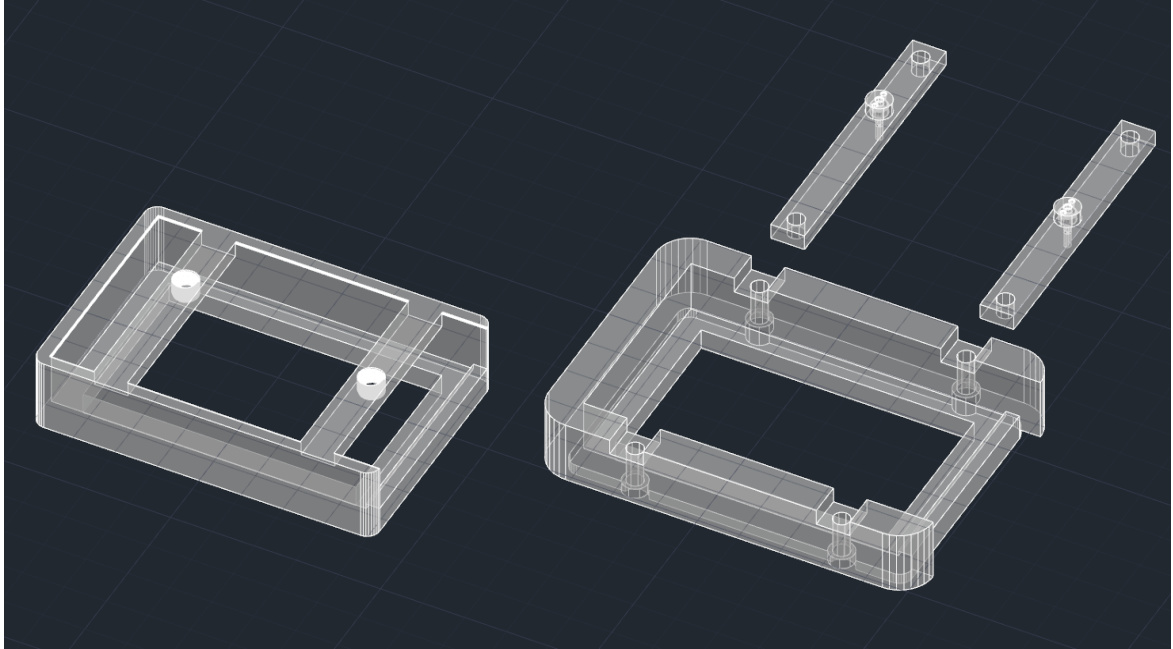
Designs for a holding frame to be printed out by a 3D printer.
